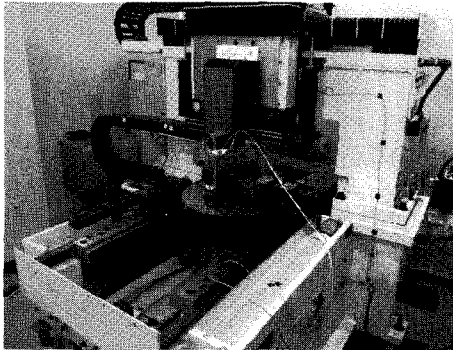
3D probe system setup for the R-Test experiment on a 4-axis machining machine
